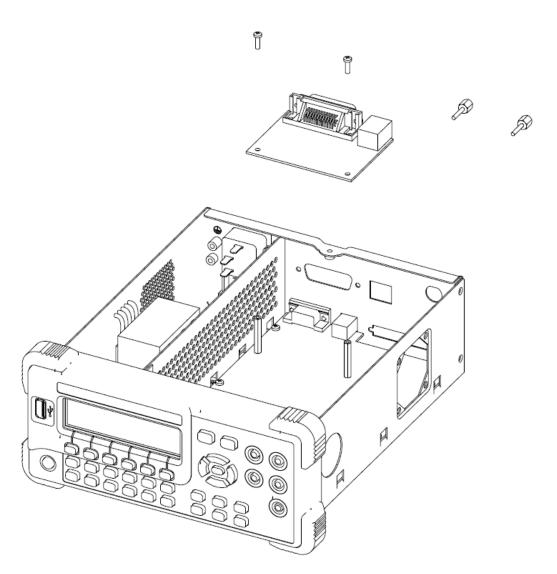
The Schematic of Disassembling and Assembling GPIB PCB
